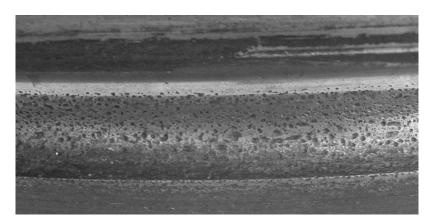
The traces of both corrosion and pitting on the race of a ball bearing
